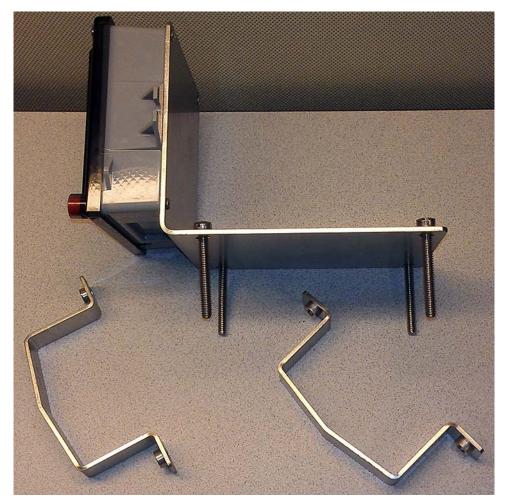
4. GPR/Bracket Assembly for Horizontal Pipe Installation
